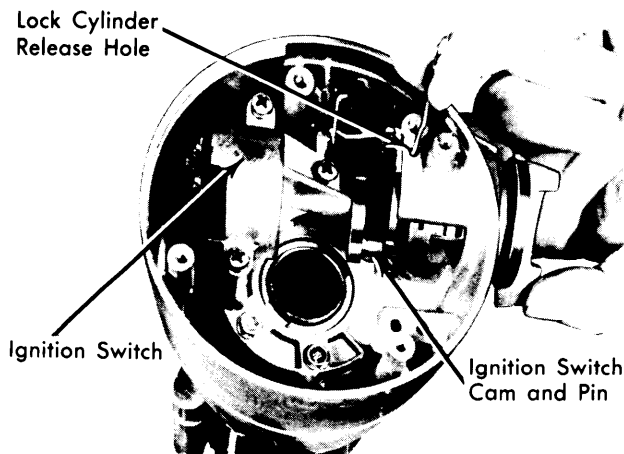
Depressing Lock Cylinder Retaining Tab On Chrysler Corp. Models With Standard Steering Columns
